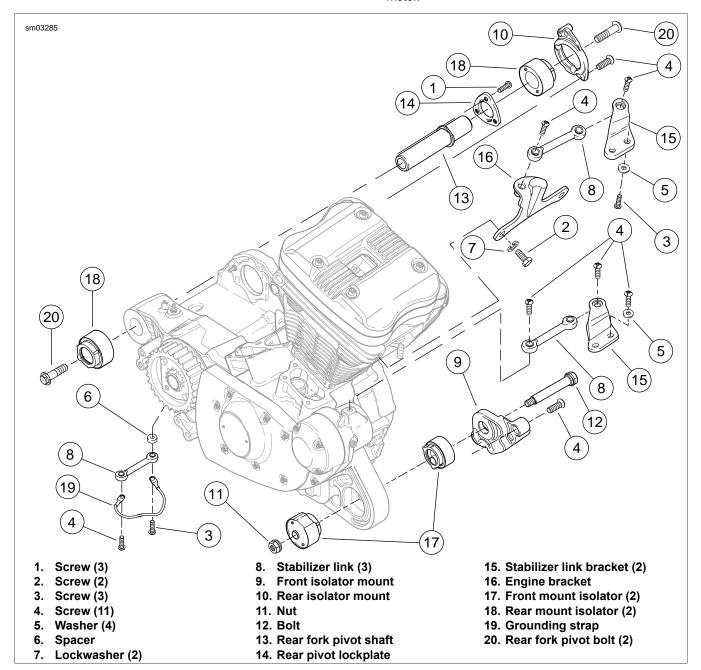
Engine Mounting Assemblies: All Models (typical)
